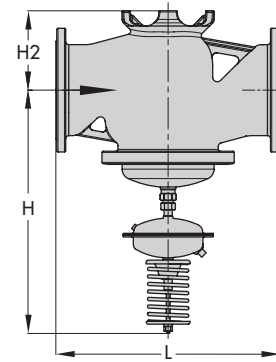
Dimensions of Types 42-20/42-25, Type 2422 Valve balanced by a bellows with Type 2420/2425 Actuator
